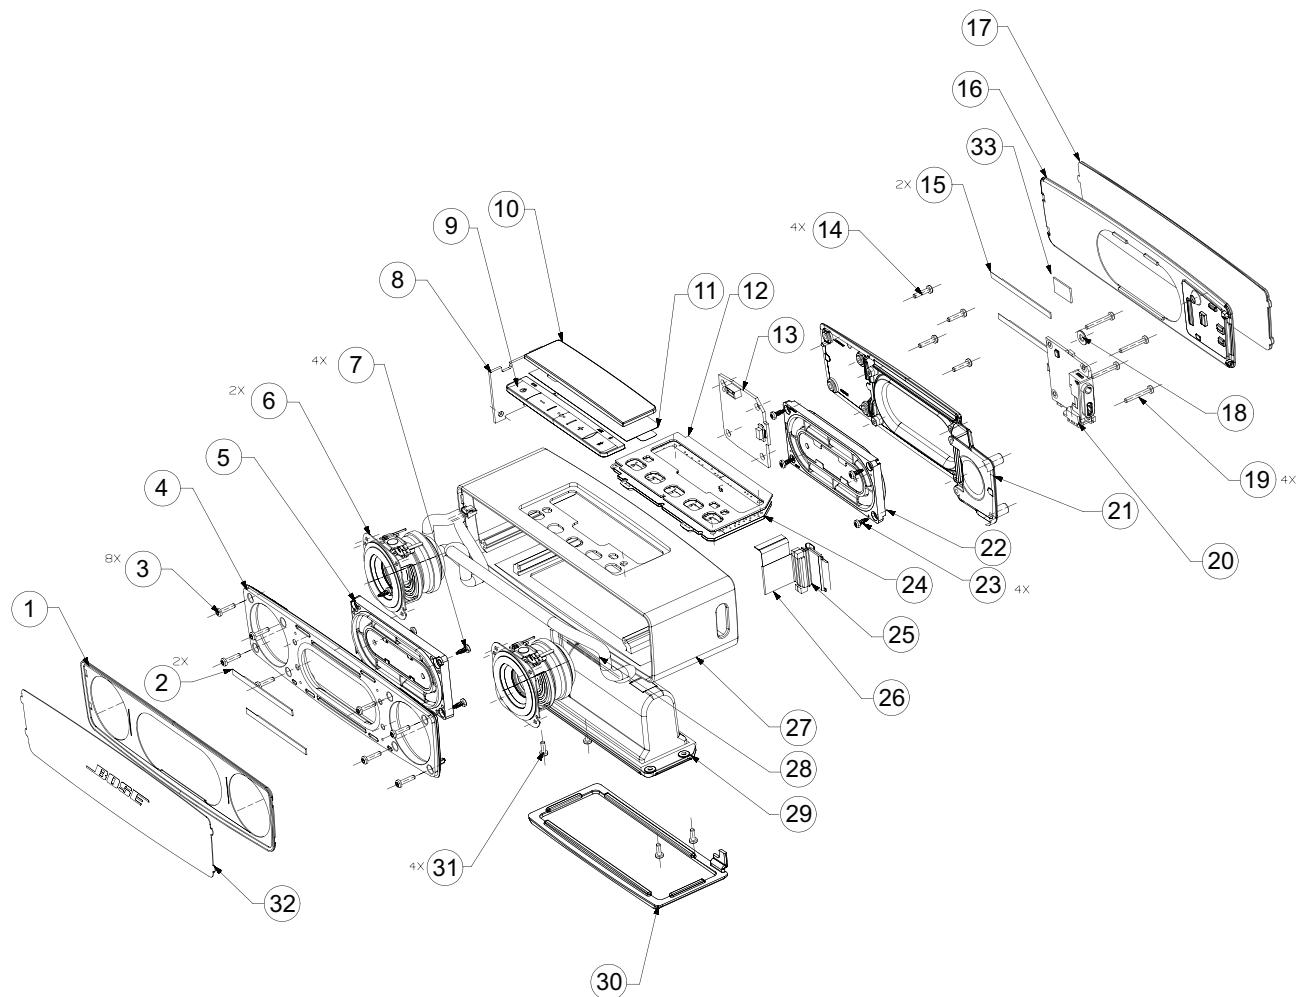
SoundLink Mini II Main Assembly, Exploded View
